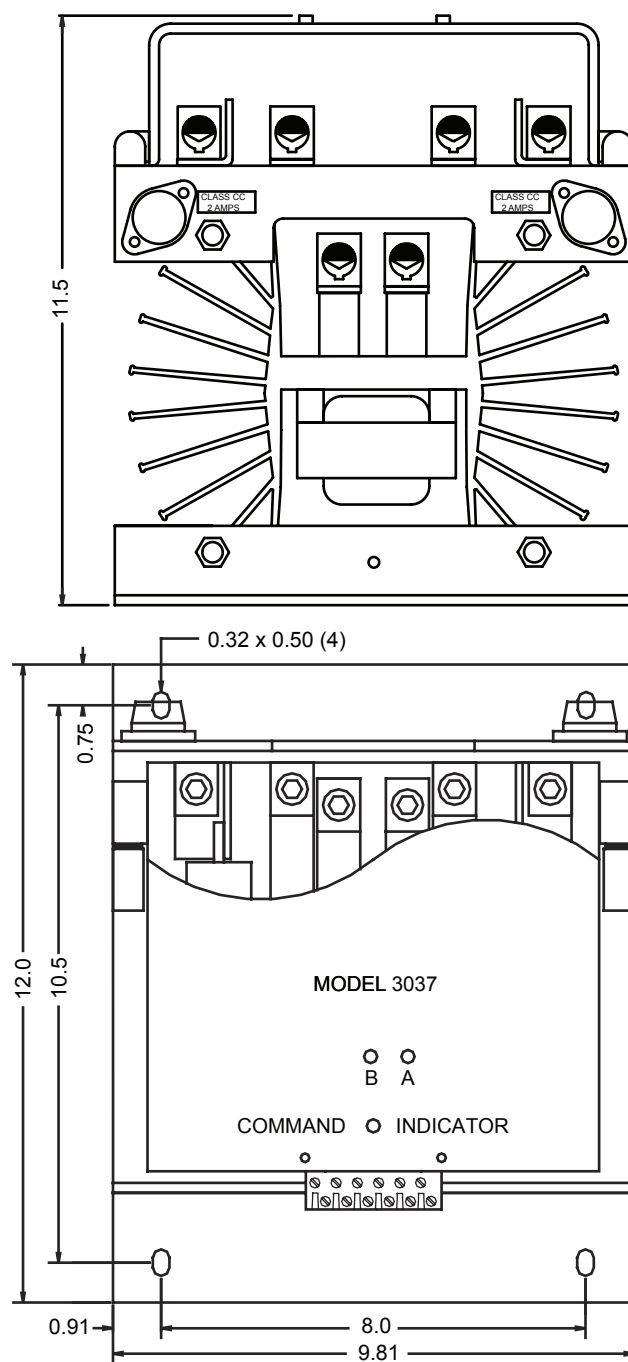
Mounting dimensions for Model 3037 - 85, 145 & 175 Amp.
